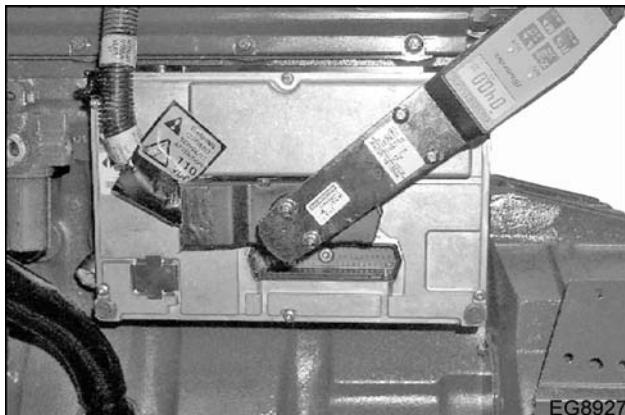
Torque ECM connector cover retaining screws (rear mount ECM)
